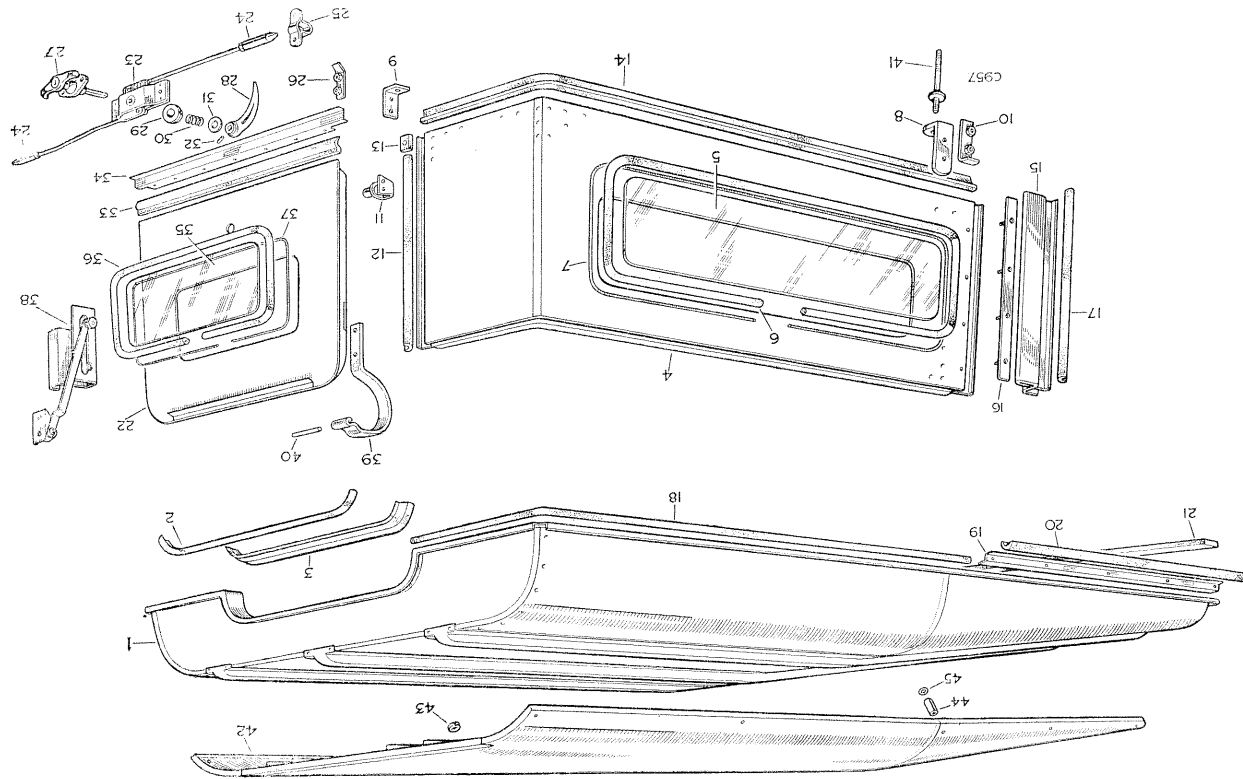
Layout of hard top and tropical roof, fixed windows, showing early type lid
